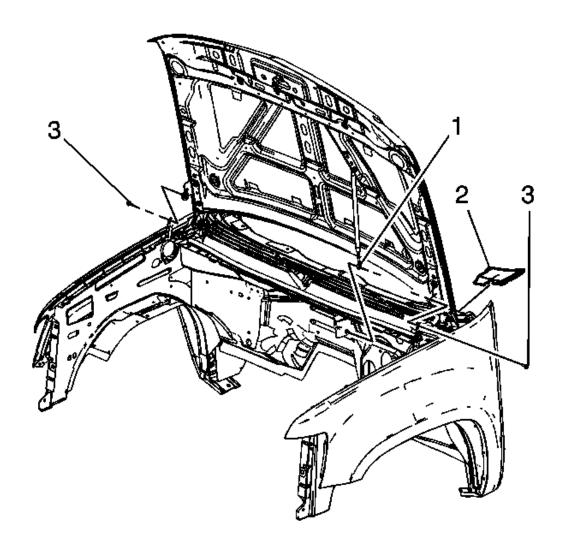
View Of Hood Strut Rod, Grille End Caps & Hood Hinge Bolts Courtesy of GENERAL MOTORS CORP.
